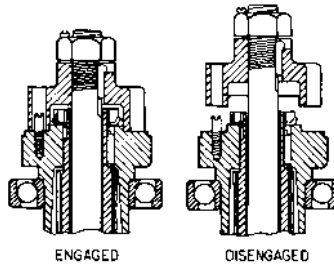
Self-release coupling connecting pump head shaft to hollow shaft of vertical motor disengages as a result of pump shaft couplings unscrewing (U.S. Electrical Motors).
